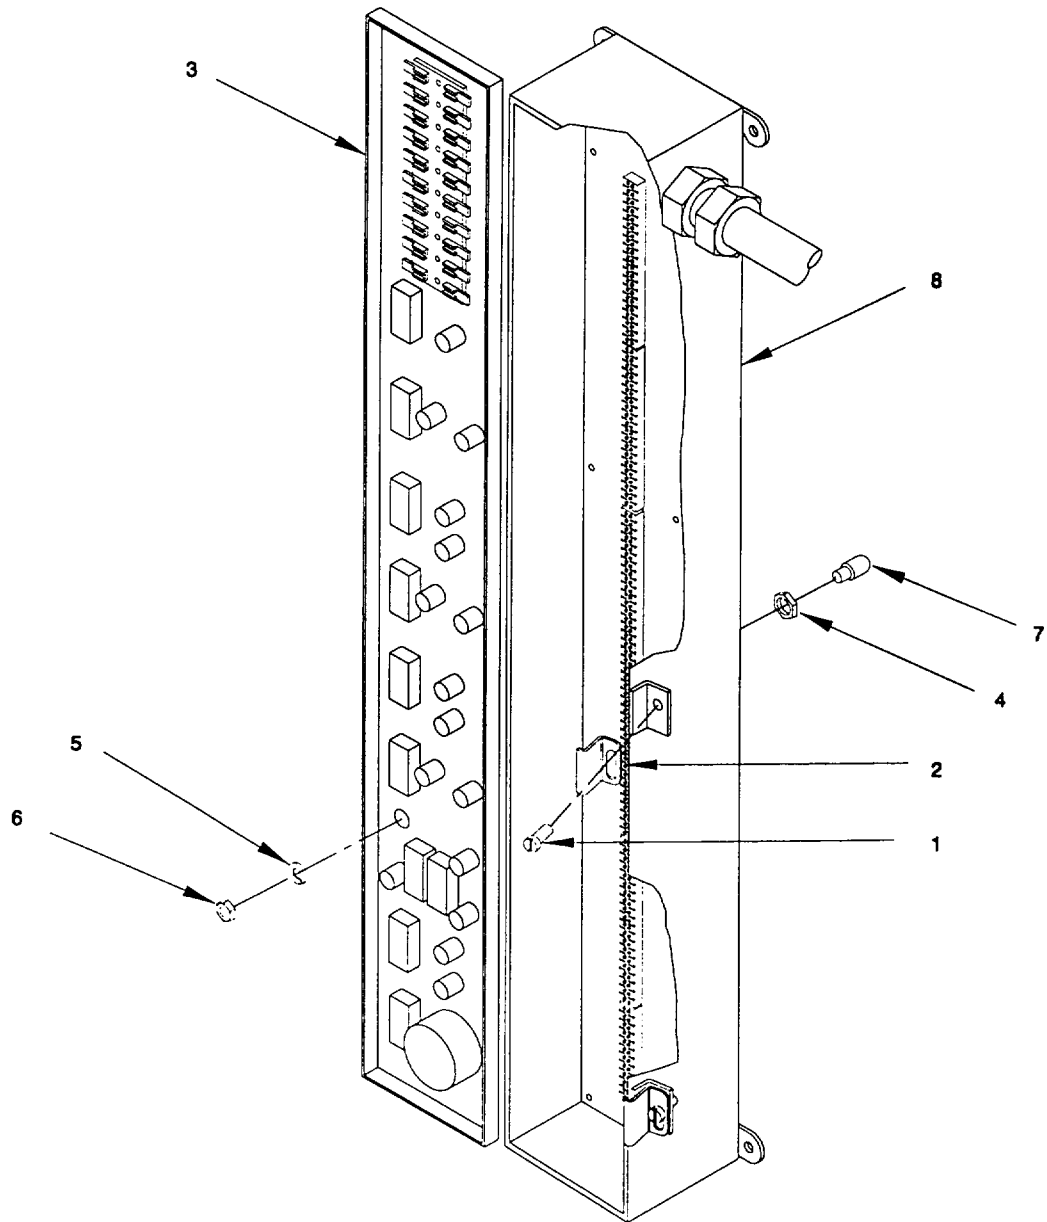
Indicator Light, Mast Enclosure, Remove/Install.
